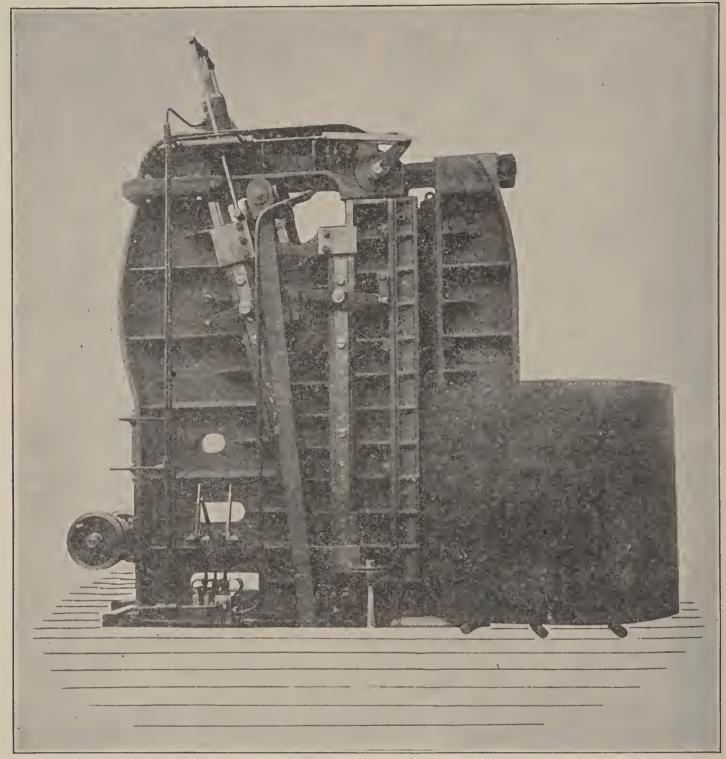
Hydraulic plate-bending machine. This tool can be utilized for bending boiler plates up to 10 feet in width and $1\frac{1}{4}$ inches thick.
